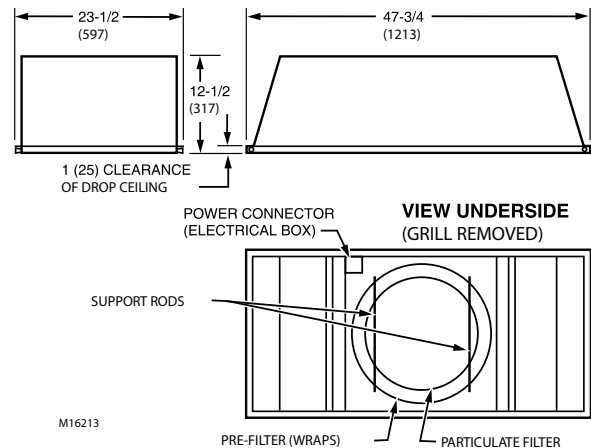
Approximate dimensions of CA118 in inches (mm).
